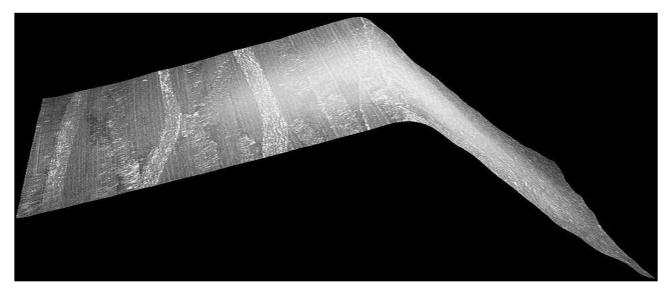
Example of a 3D view of a machined surface profile (for milling conducted with a 4-tooth PCD-coated carbide end mill,  $v_c = 120 \text{ m.min}^{-1}$ ;  $f_z = 0.08 \text{ mm.tooth}^{-1}$ )
